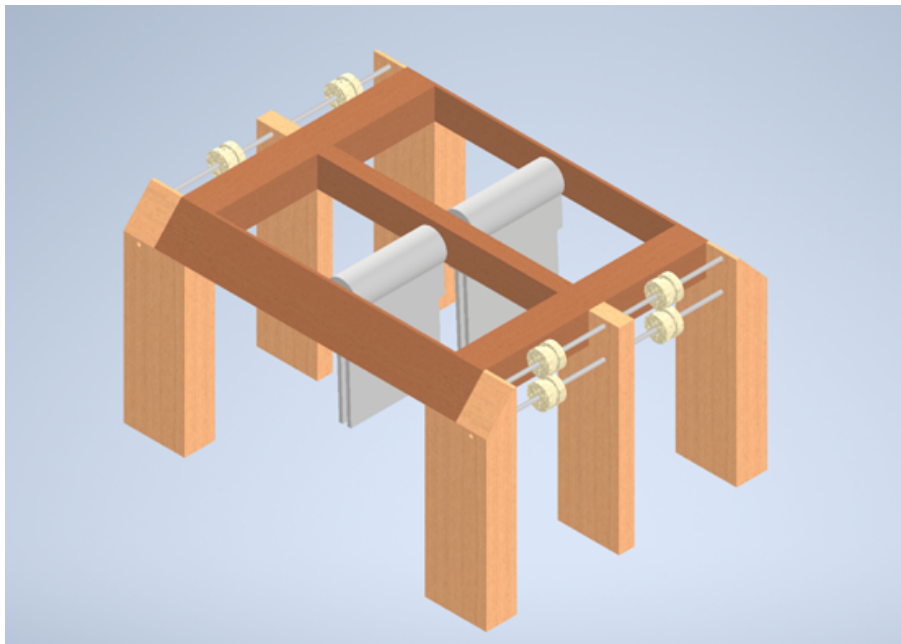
AutoCAD model of ergometer pedal housing design
